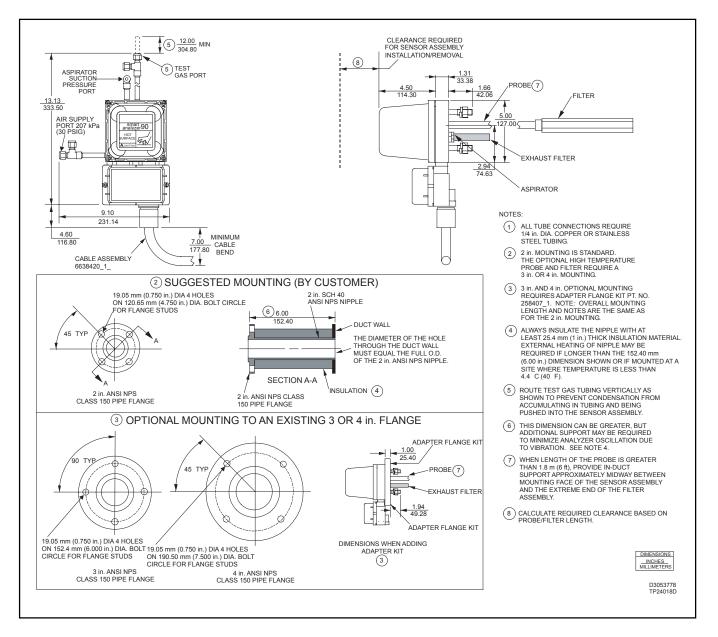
Outline and Clearance Requirements (Sensor Assembly)
